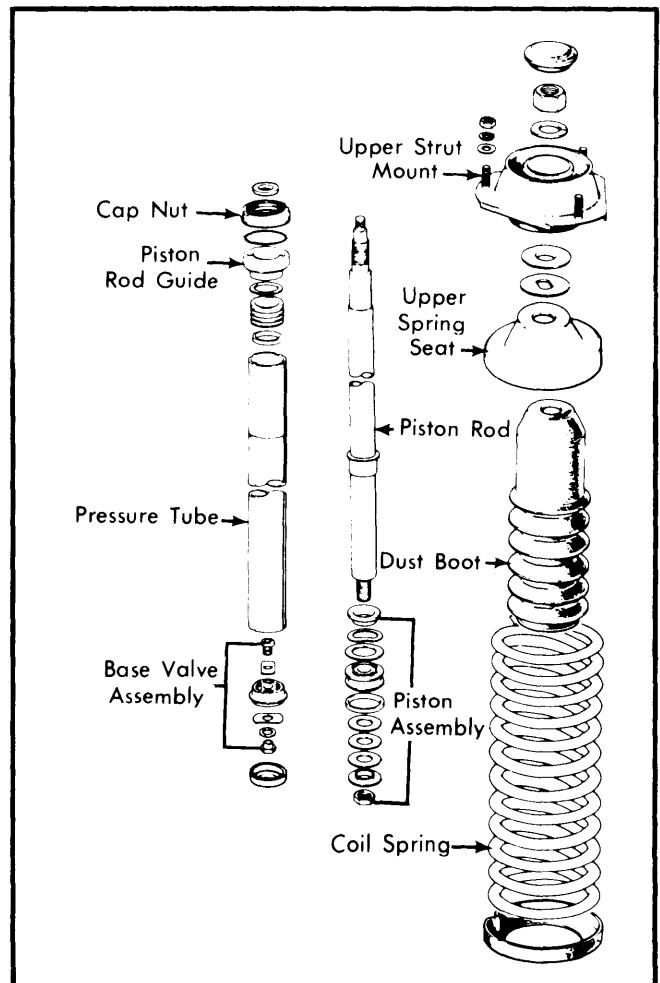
Exploded View of Strut Assembly 808 Models Shown, Others Similar
